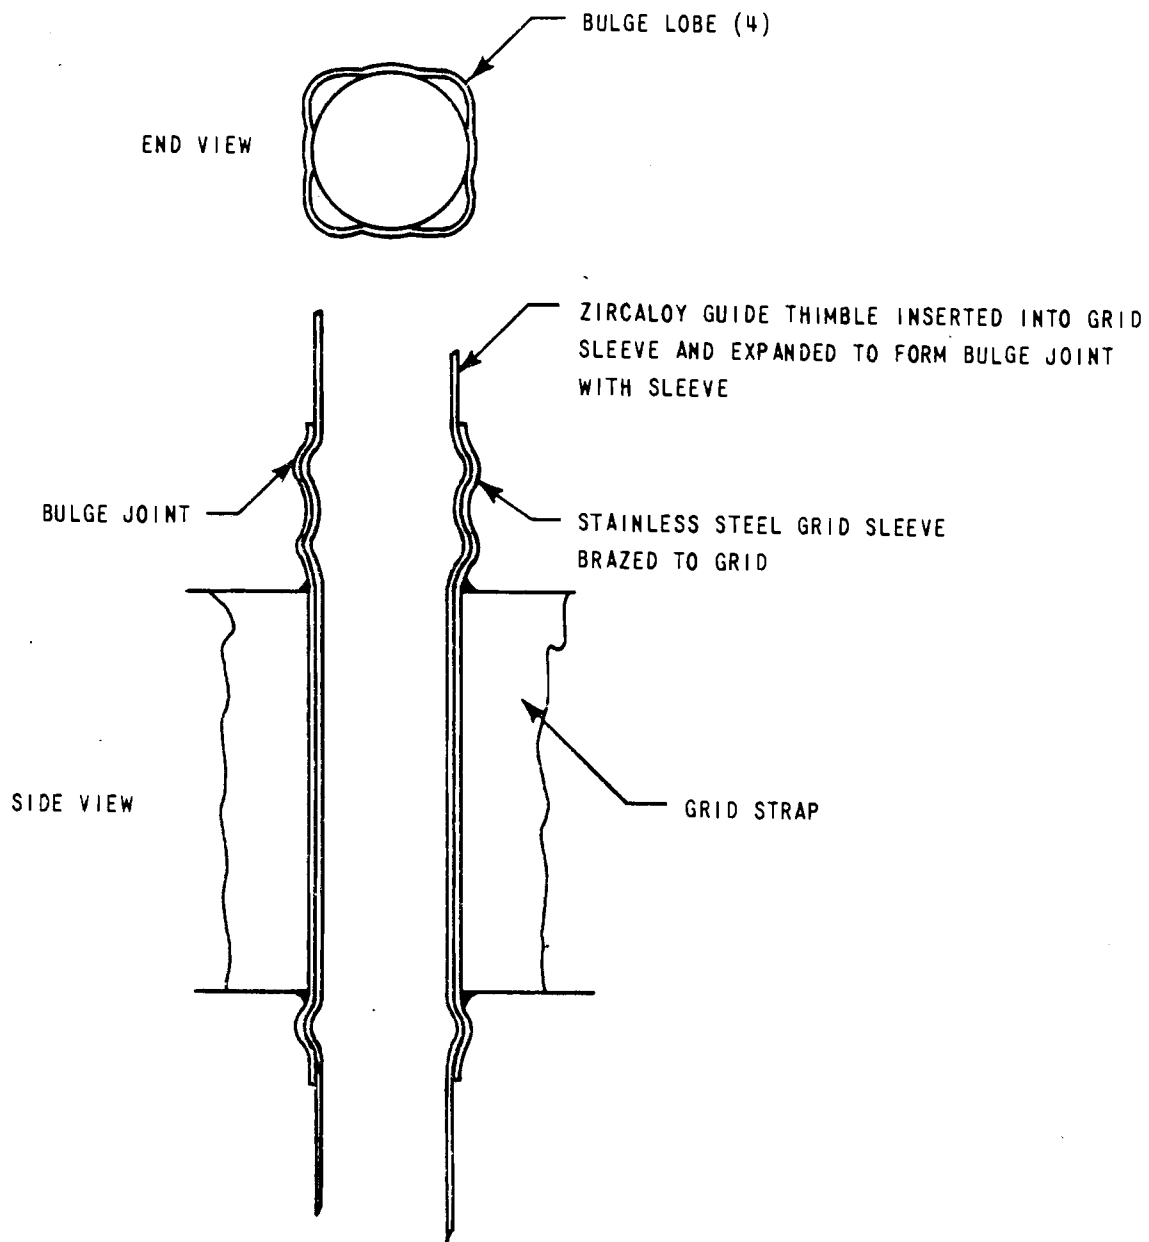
Longitudinal Section through Guide Thimble-to-Grid Bulge Joint (Westinghouse Fuel Bundles)
